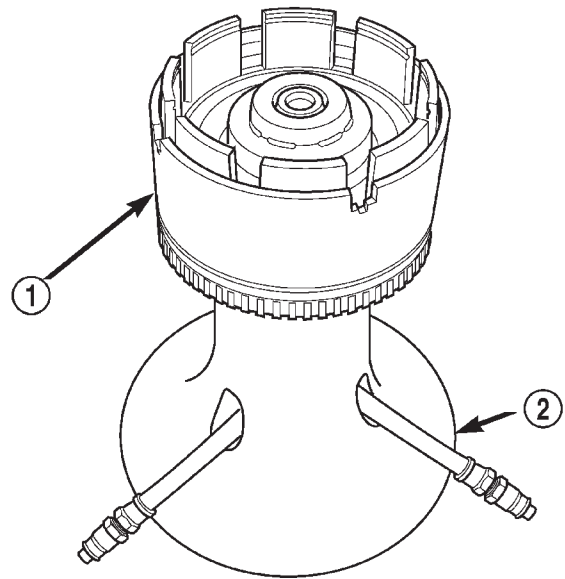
Input Clutch Assembly on Pressure Fixture Tool 8391
